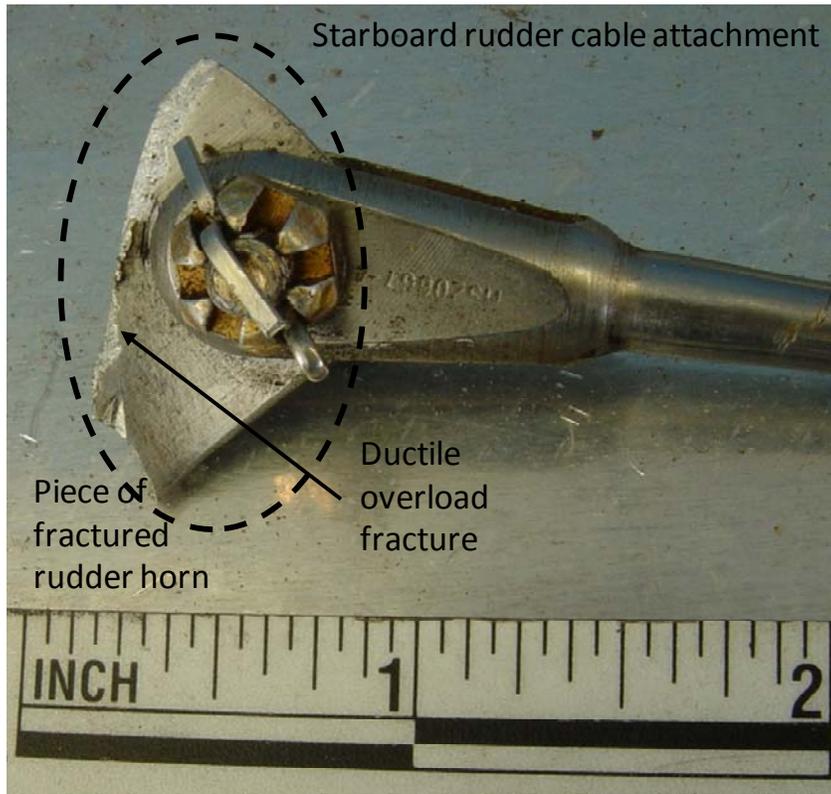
Macrograph showing a fractured piece of the starboard side rudder horn.
